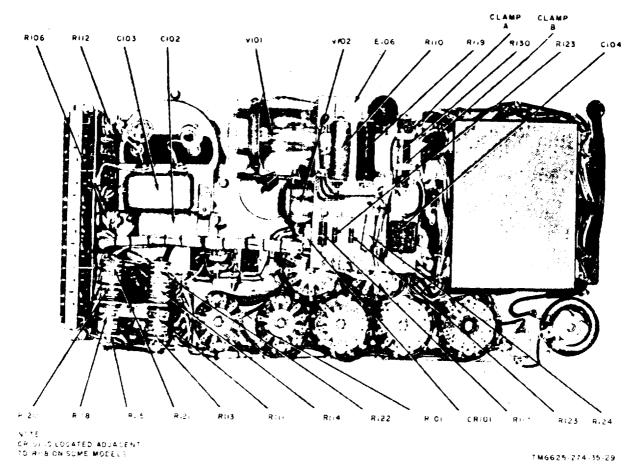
Test Set, Electron Tube TV-Y/U, direct-rear view.
